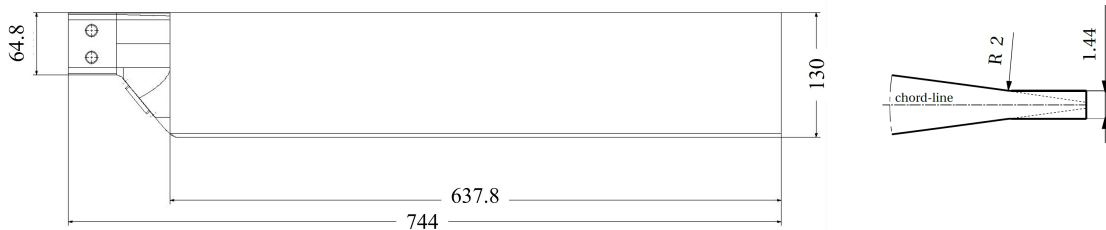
MERIT rotor blade sketch and profile tab geometry in mm [22]
